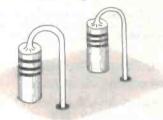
Whilst axial lead components (i.e: resistors) are generally mounted horizontally on a pc board, they are sometimes mounted vertically. Leave a millimetre or so clearance between the bottom end and the board.
